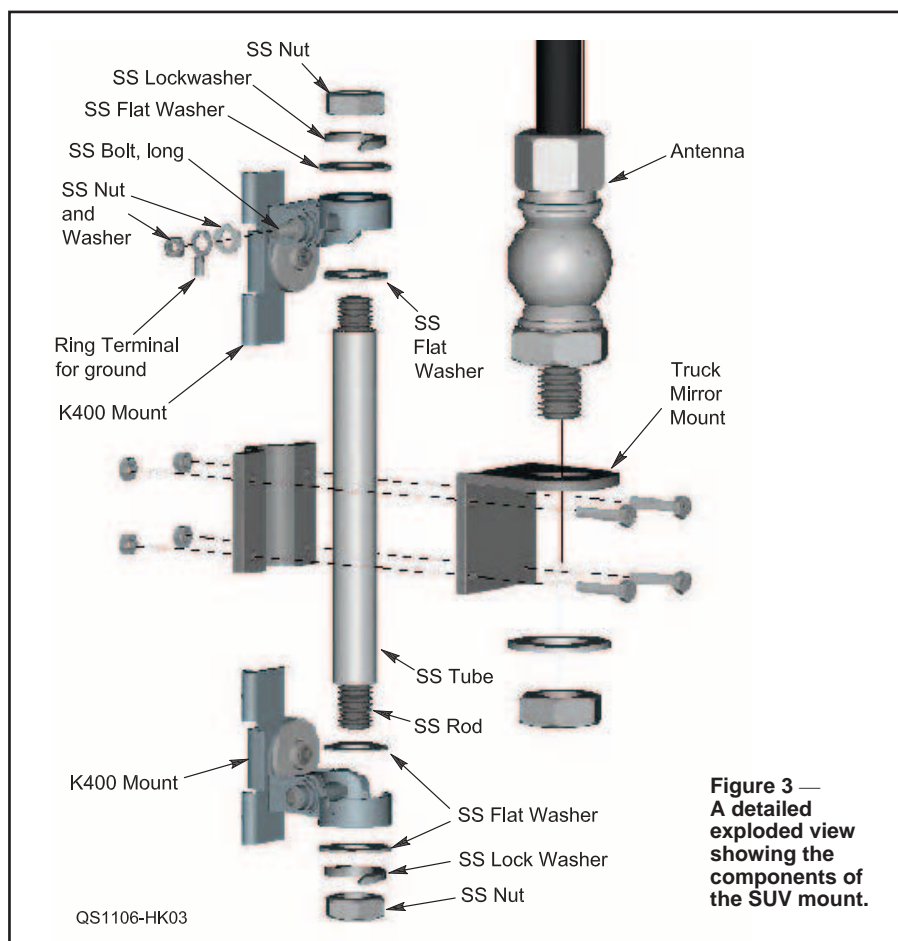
A detailed exploded view showing the components of the SUV mount.
